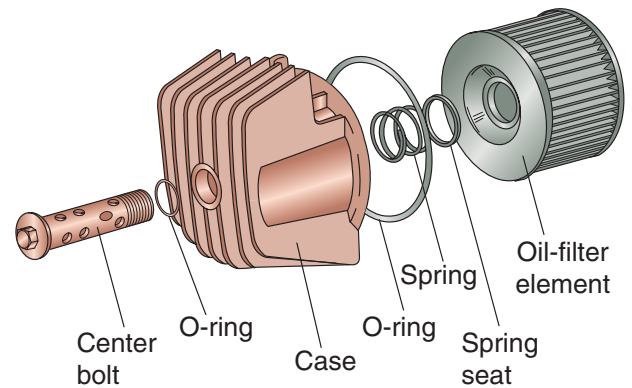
A paper-style cartridge oil filter, with components that complete the oil filter assembly.
